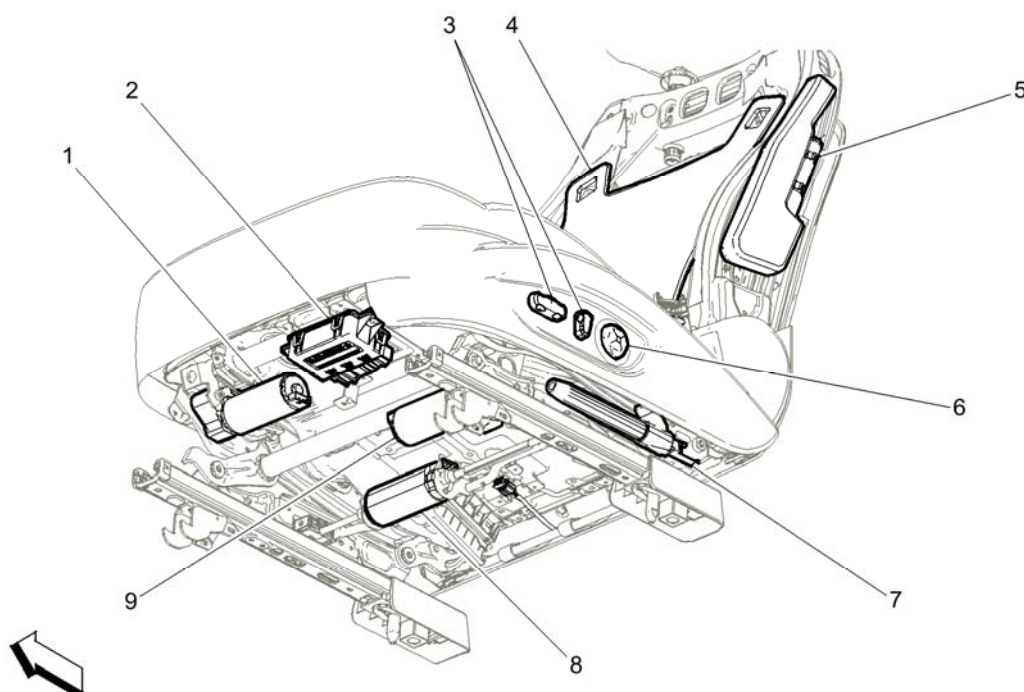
Bottom of Driver Seat Component Locations (except A45)
